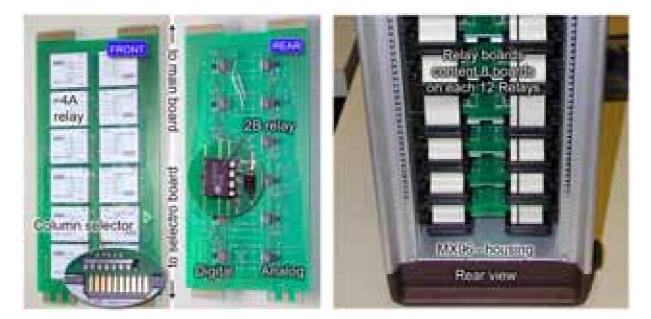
Relay board PCB front and rear view (left), placement of relay boards in MX96 – rear view (right)
